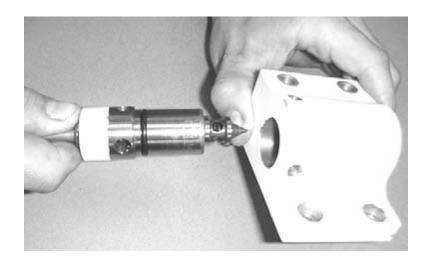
Installing Trolling Valve Parts Into Trolling Valve Body
